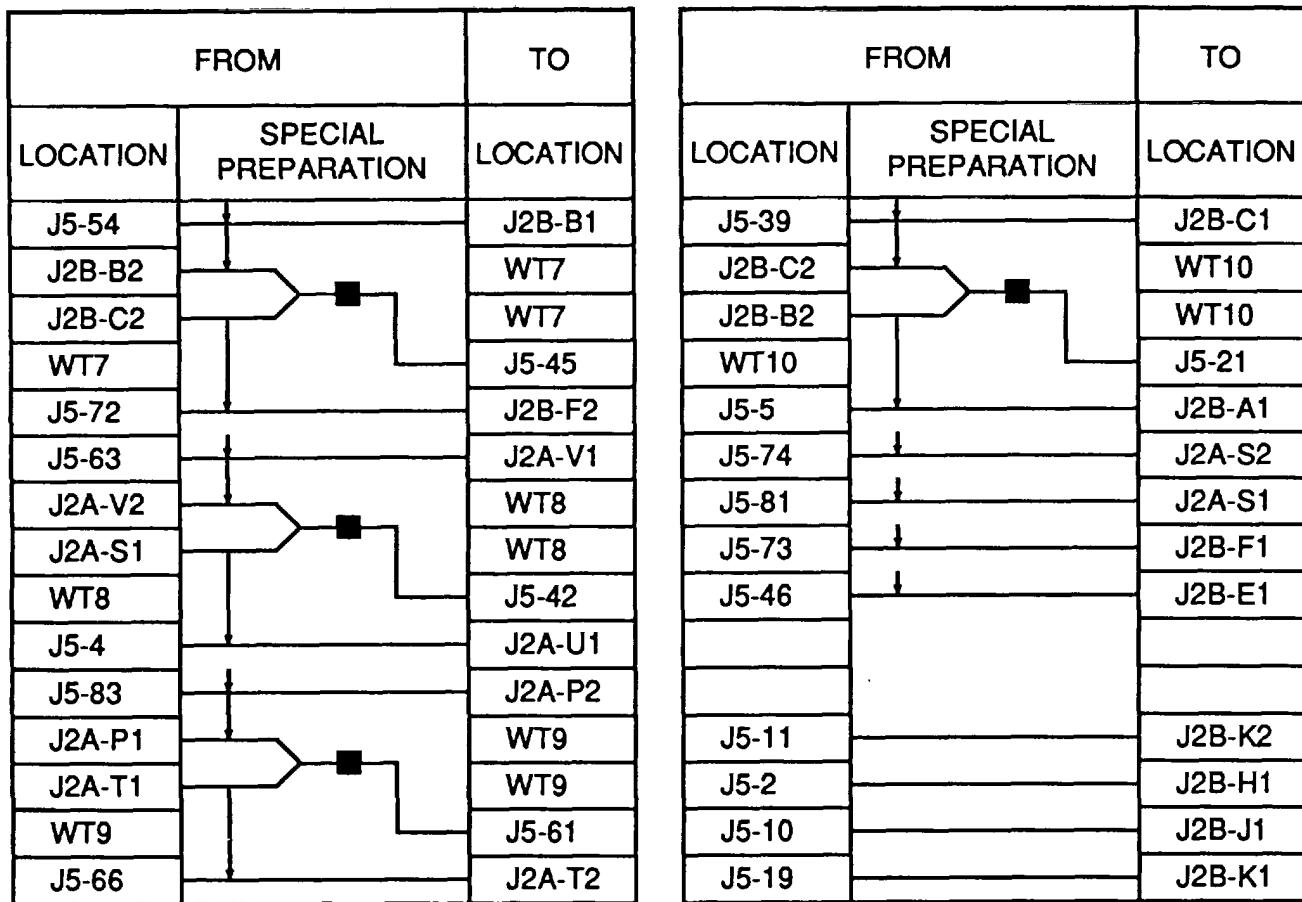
UNIBUS In Adapter Assembly Wiring List
